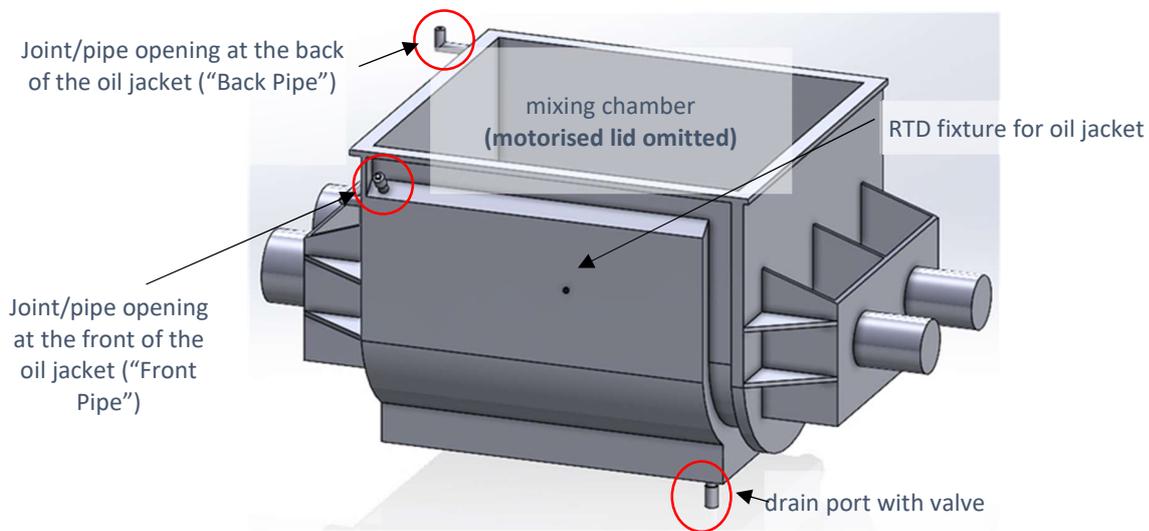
Front view of mixer machine with the three openings on oil jacket circled in red
